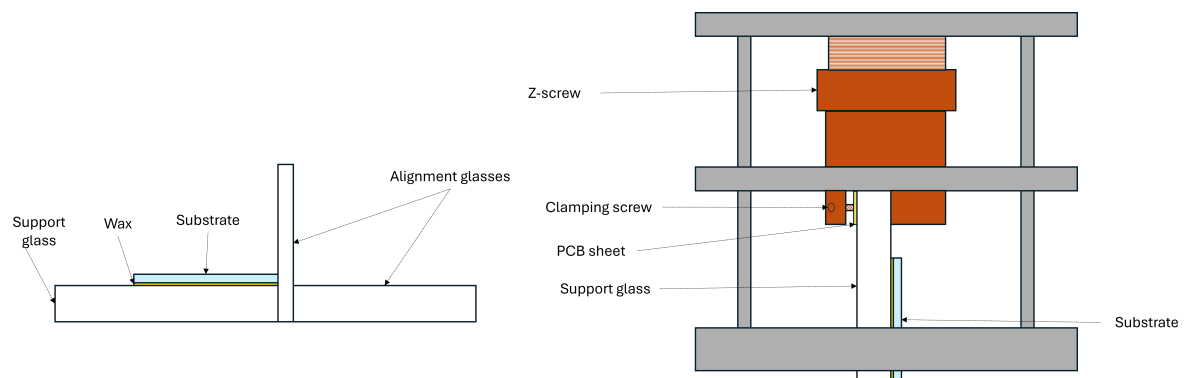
a) Substrate alignment using the auxiliary glasses; b) Polishing jig with glass assembly.
